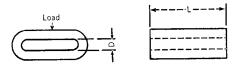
DEFORMED SPECIMEN OF VACUUM BRAKE HOSE
